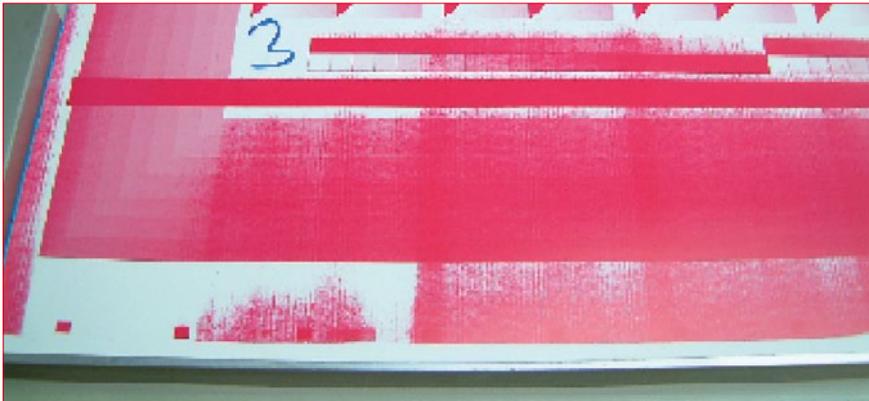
(top) and Fig 4 (bottom): The printed sheet (top) clearly shows the impact of the defective rollers in the inking unit.
